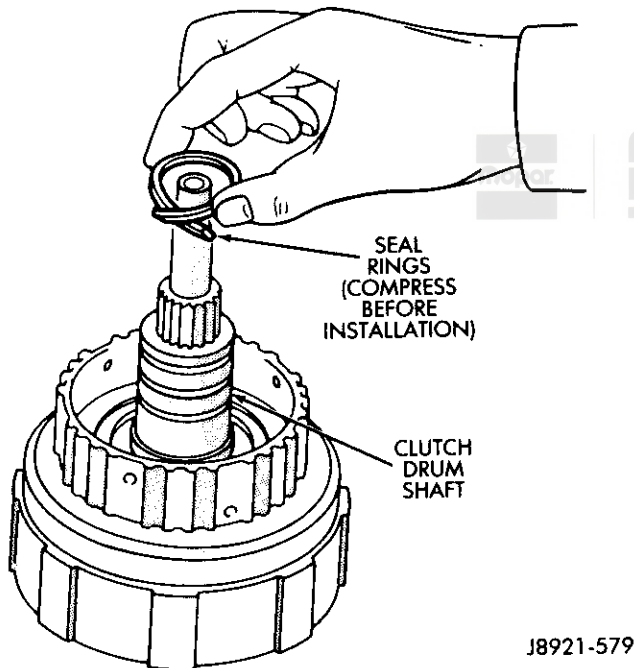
Installing Clutch Drum Shaft Seal Rings
